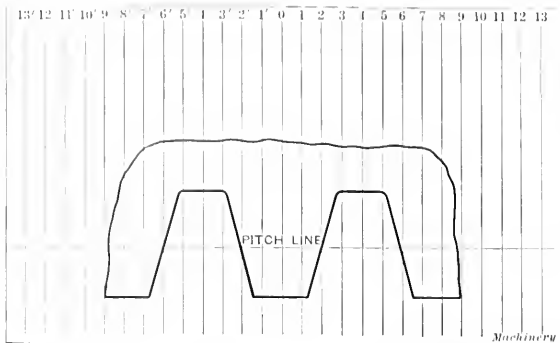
Short Section of Rack laid out on Enlarged Scale
